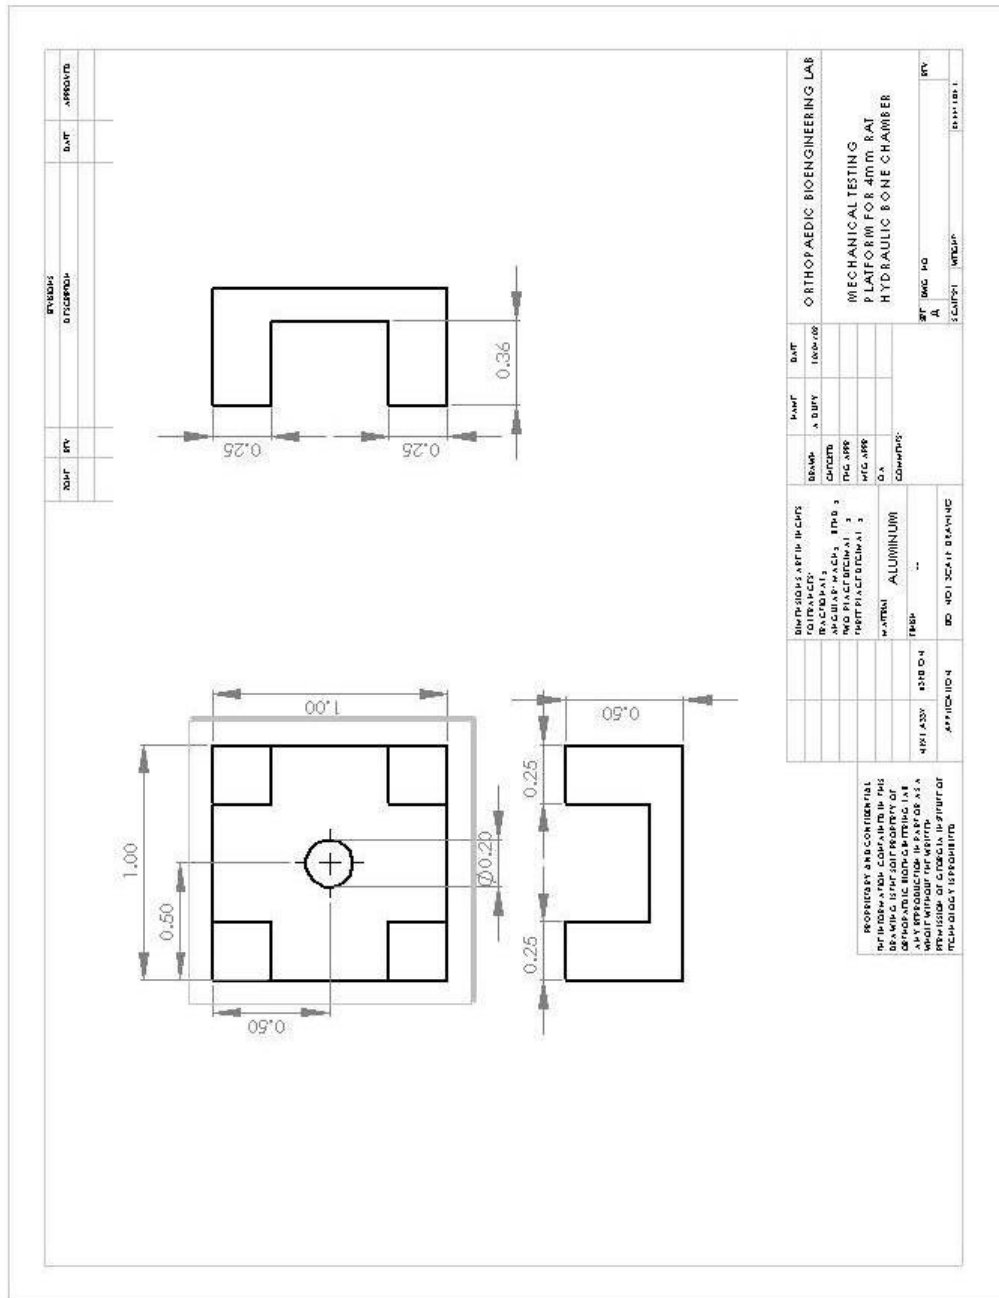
Machine Drawing of Tabletop Platform for Mechanical Testing within Rat Subcutaneous Chamber
